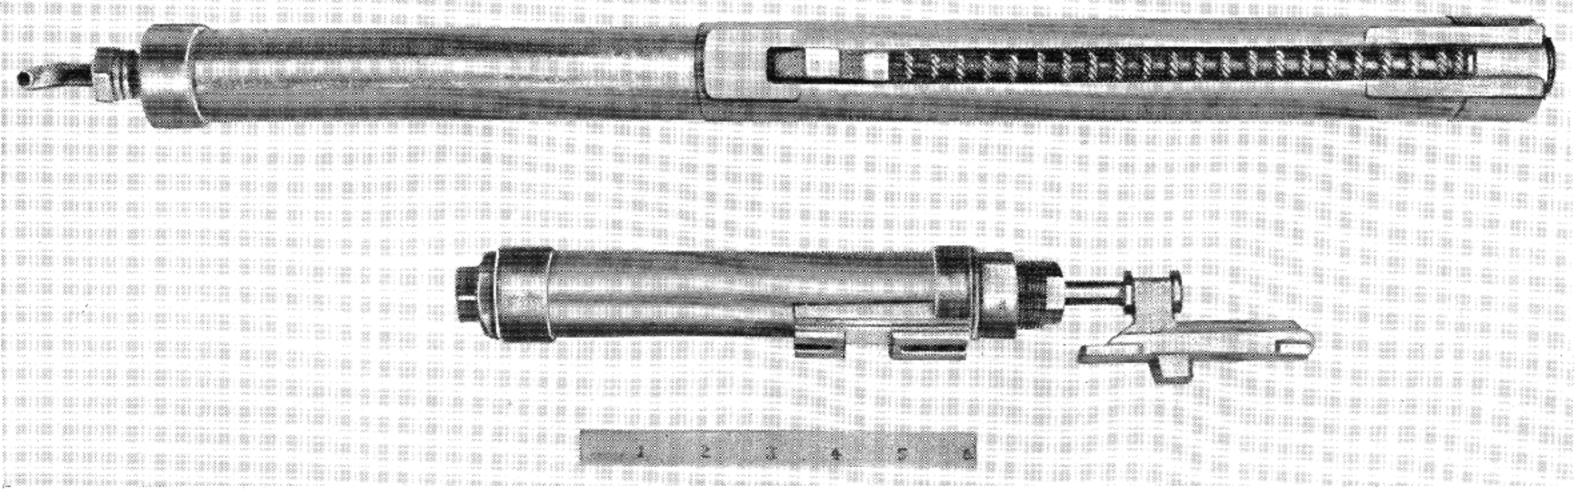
Charger and counter-recoil buffer for 23-mm NS Gun.
